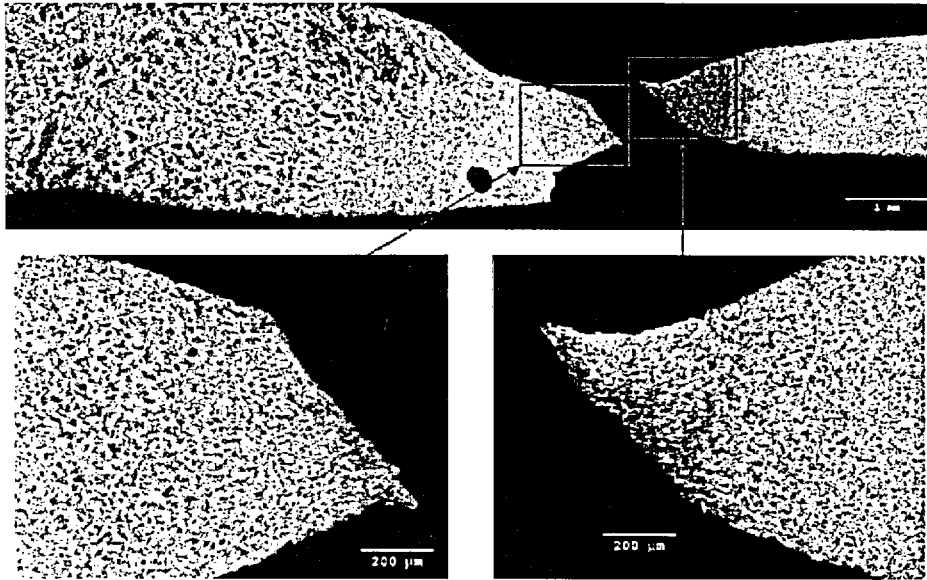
Metallographic cross section of tear #9. This sample contained a single repair weld. Grinding on the outside surface ended abruptly at the edge of the back-up bar, resulting in a deep but narrow region of liner thinning. Tearing occurred in the heat affected zone adjacent to the weld, and was accompanied by substantial localized plastic deformation.
